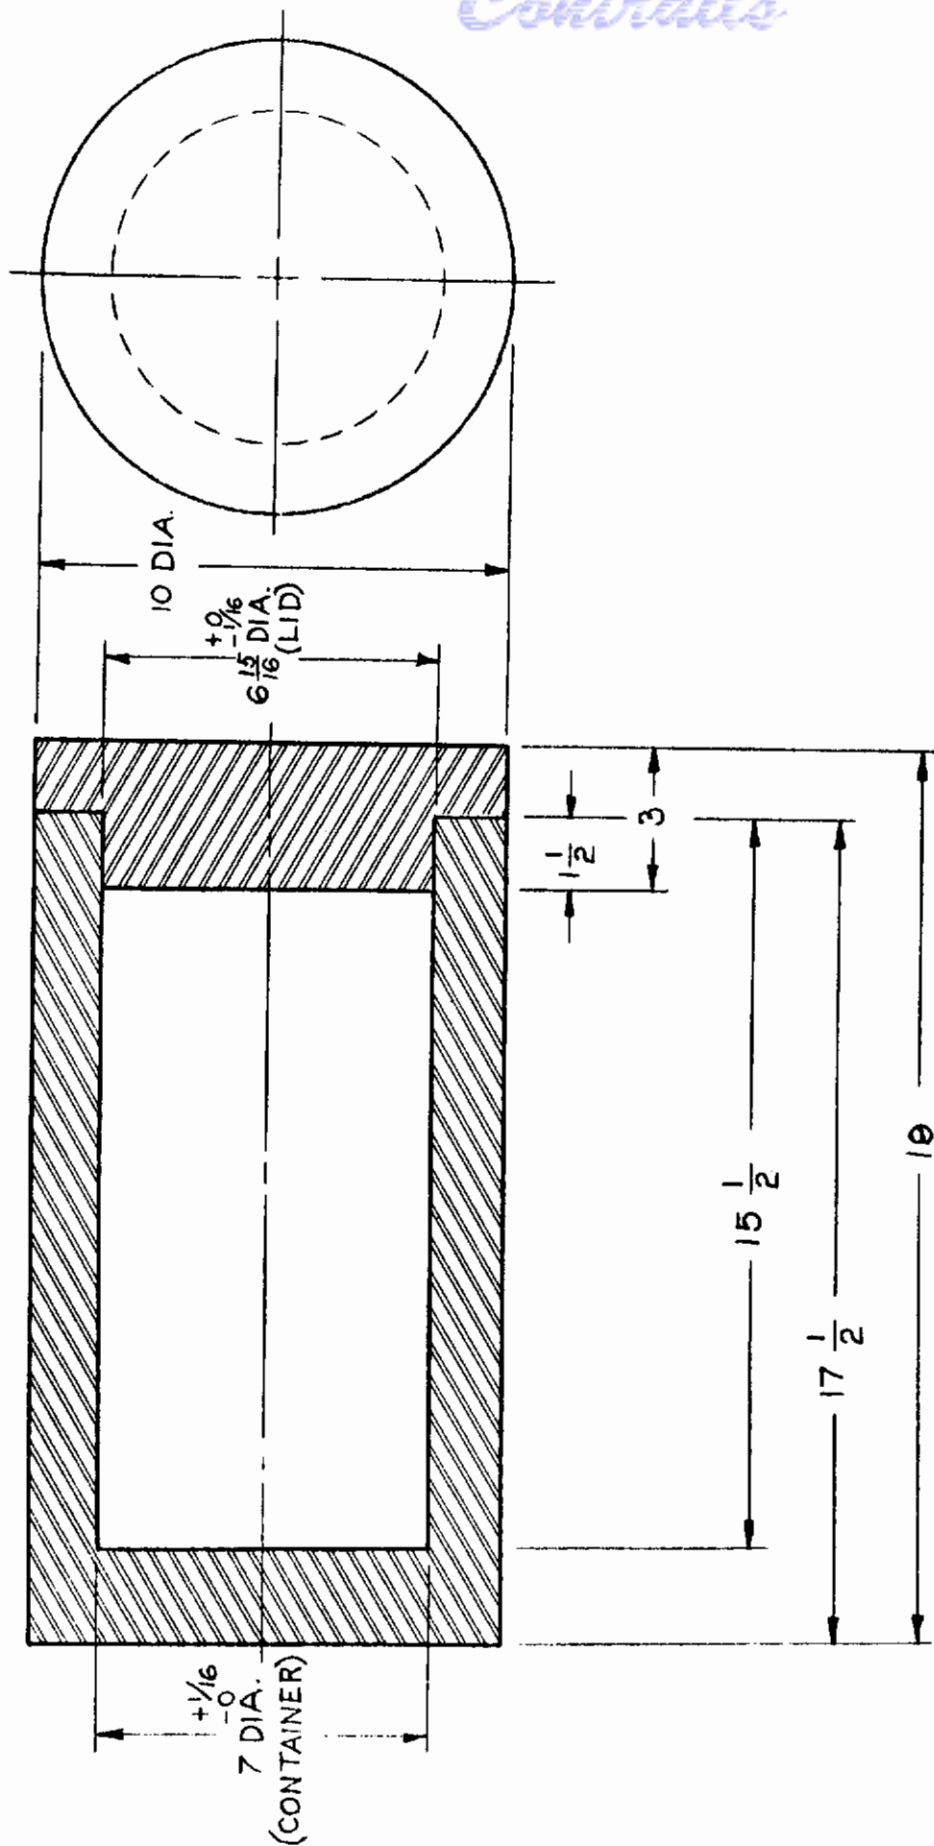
THE BERYLLIUM CORPORATION: SKETCH OF MACHINED GRAPHITE CONTAINER ASSEMBLY FOR HEATING BERYLLIUM EXTRUSION BILLETS.
